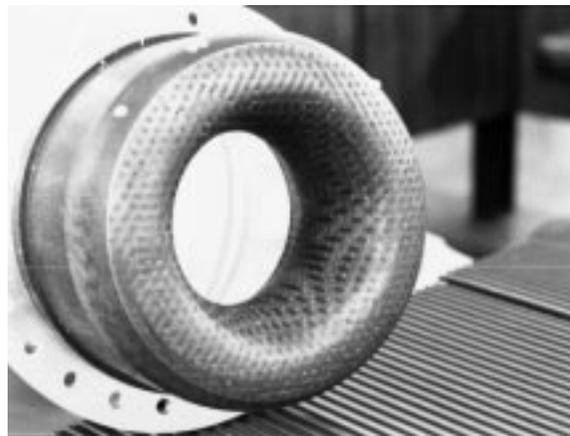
A carbon-carbon rocket nozzle throat showing the fabric pattern of the underlying fibers.
